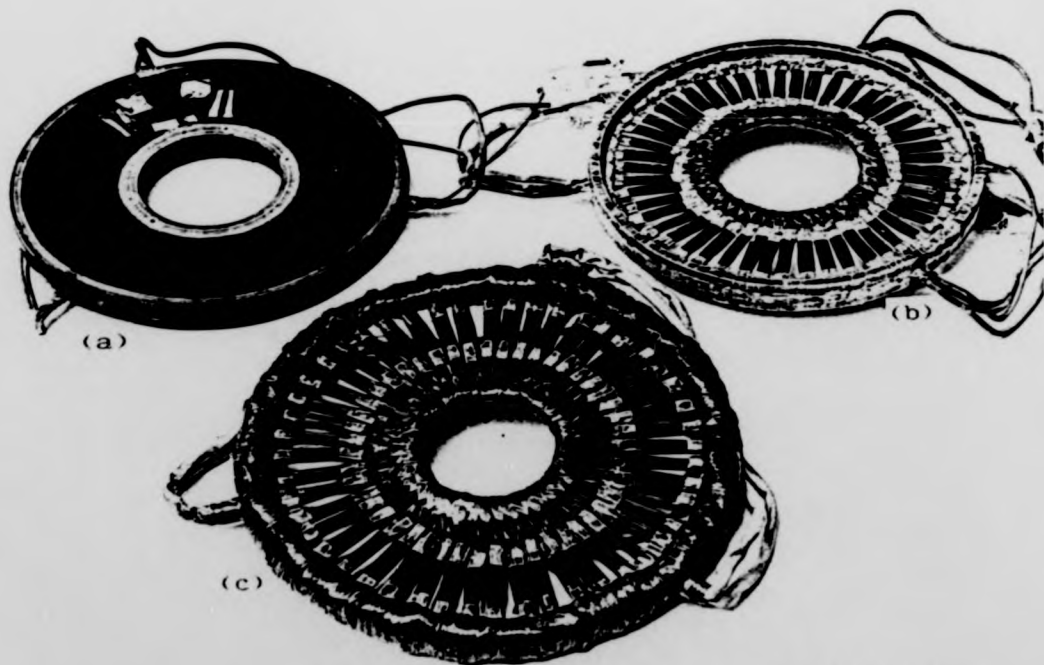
Armatures of (a) Motor 1, (b) Motor 2, and (c) Motor 3
